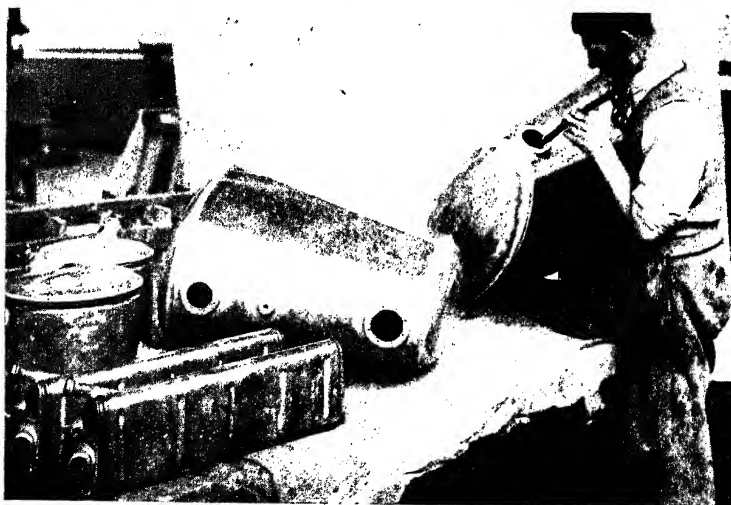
INTERNAL INSPECTION OF FINISHED TANKS.
